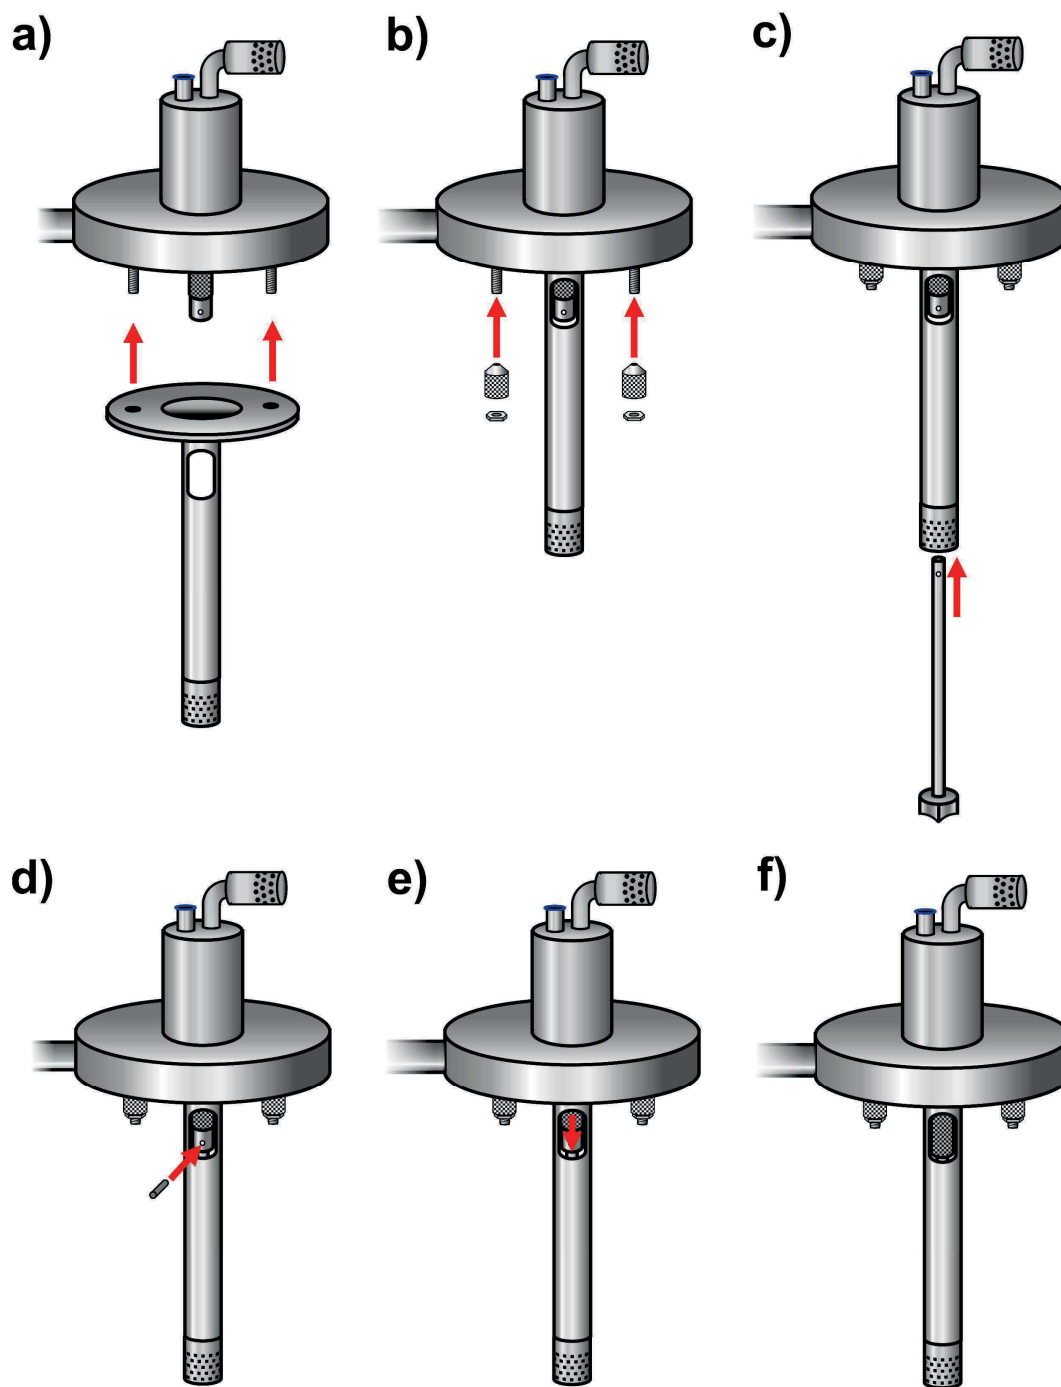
Assembly of the SFM. a) Insert the stator into the bolts that come out of the metal block. b) Use the conical screws and nuts to fixate it. c) Insert the rotor into the stator. Align the hole of the rotor with the hole of the motor unit. d) Fixate the rotor by inserting the metal aglet into the aligned holes. e) Pull the metal protection cap down. f) Assembled SFM.
